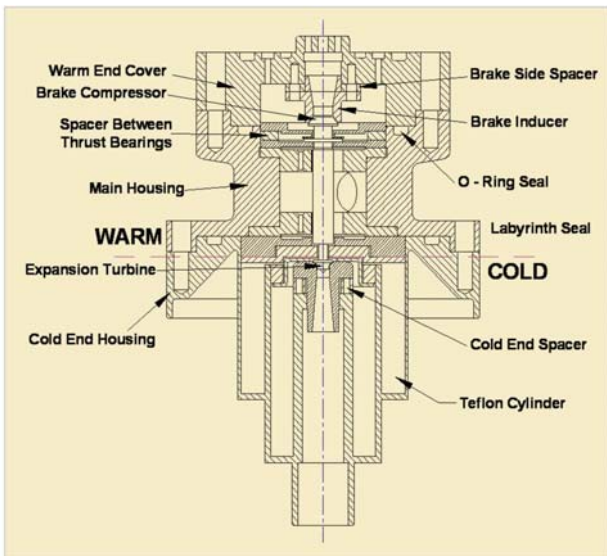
Sectional view of a typical cryogenic turboexpander housing.
